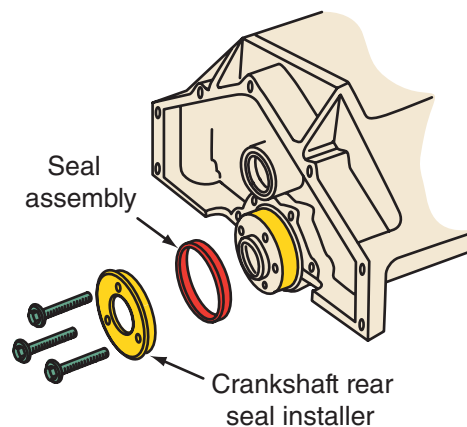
Installing a one-piece rubber rear crankshaft seal.
